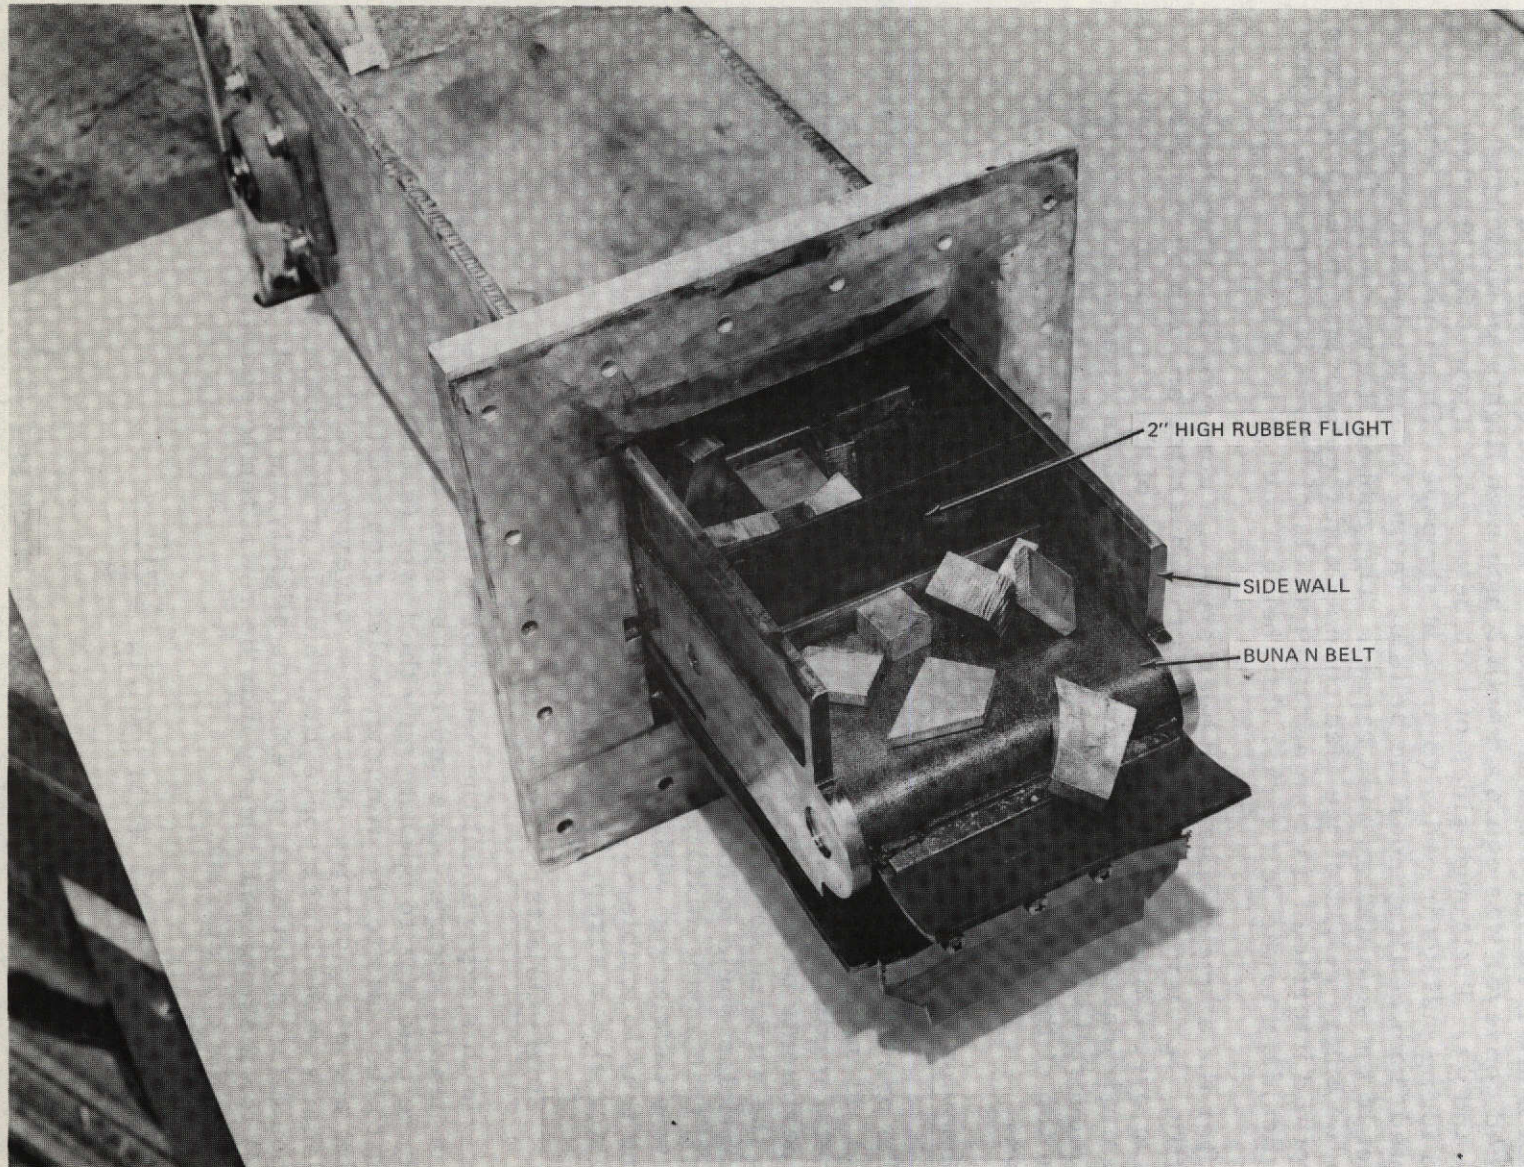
MODIFIED FEED CONVEYOR — ASSEMBLED VIEW
